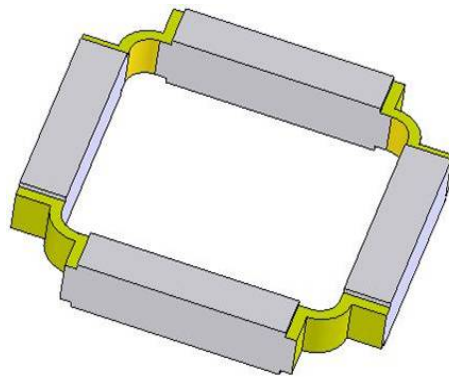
SolidWorks drawing to be imported into rapid-prototyping machine
